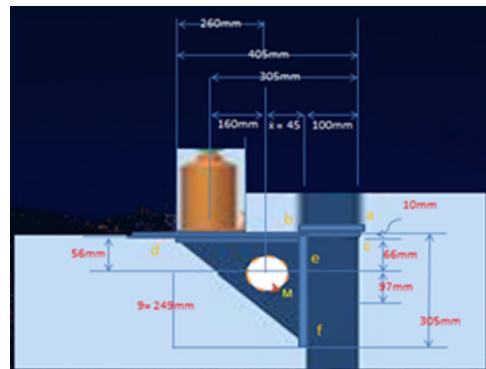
Identified load bearing point in the lifting device where appropriate weld is applied
